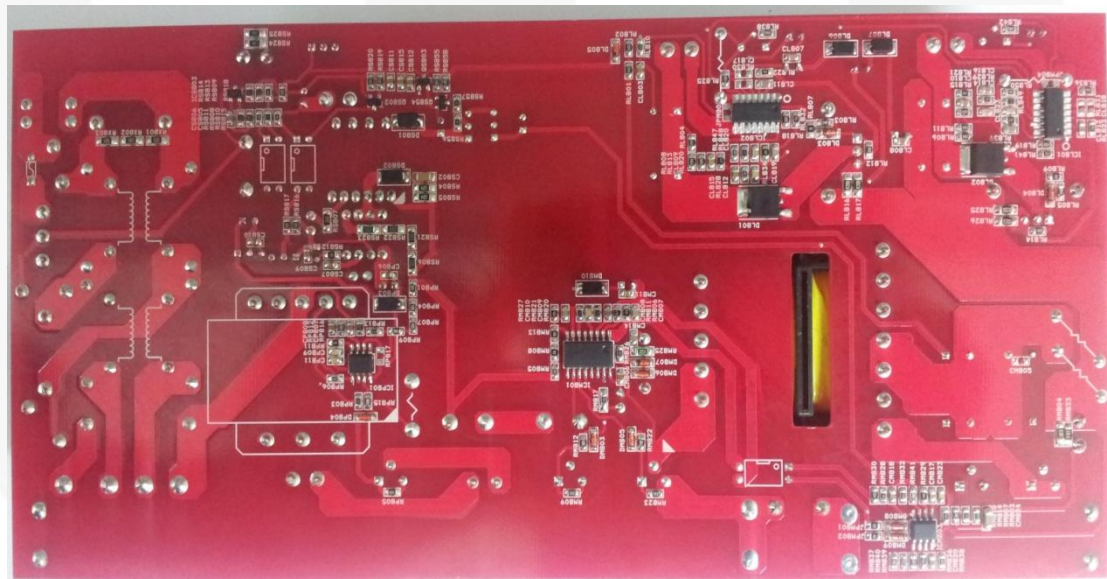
Bottom View [Dimensions: 232mm (L) x 114 mm (W) x 27 mm (H)]
